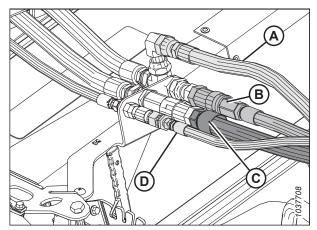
Windrower Hydraulic Hoses Connected to Header – View from Rear of Header
